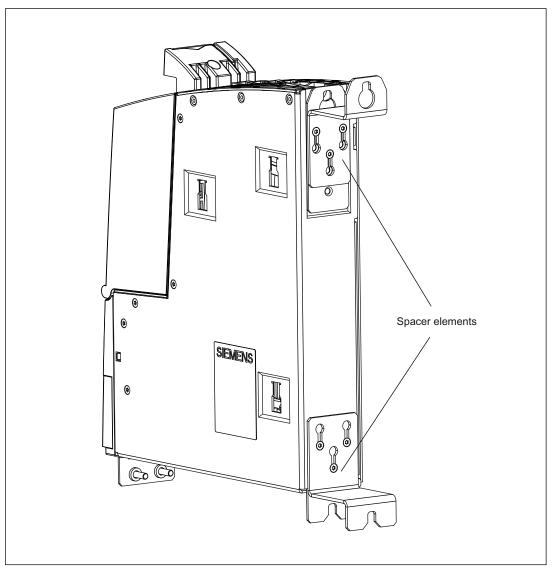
Installing the CU320-2 DP on a mounting surface using spacer elements
